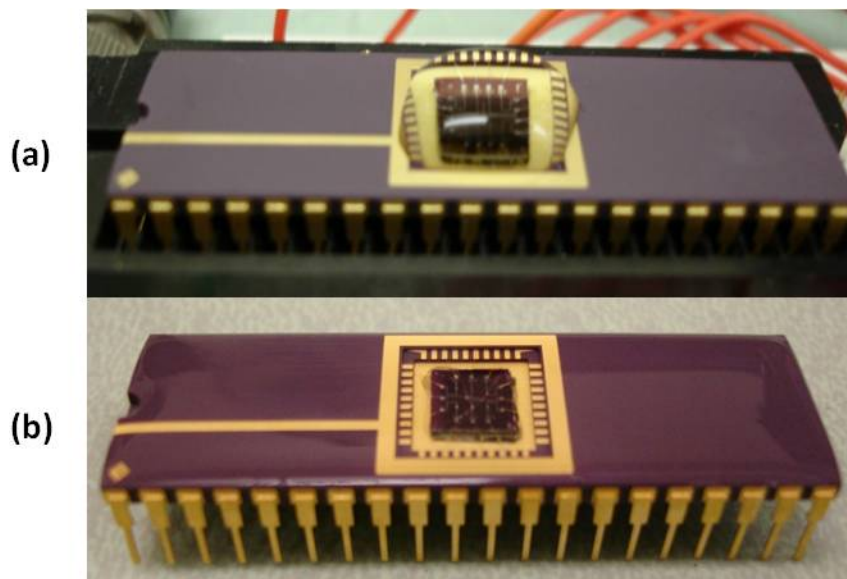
(a) Gold wire bonded to the device bond pad and (b) the DIP package pad.
